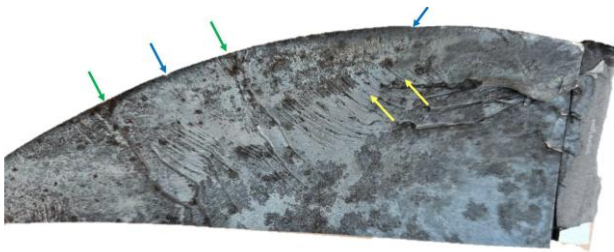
Conveyor pulley shaft fractured surface.
